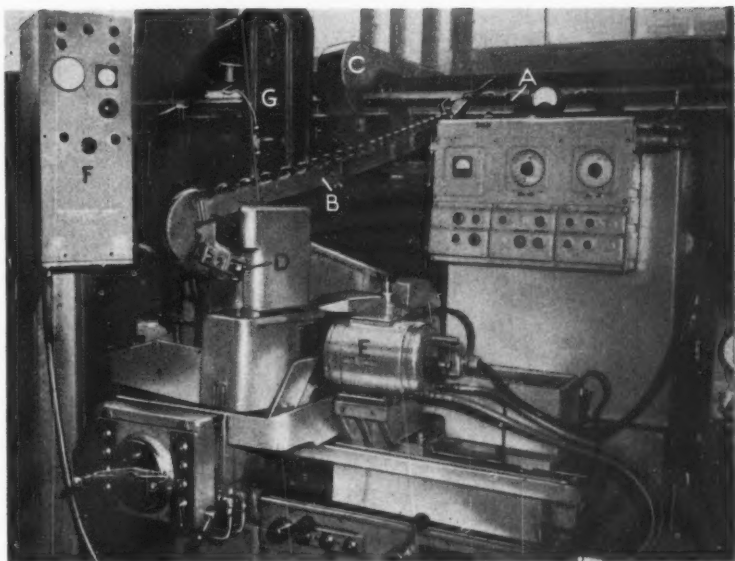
This Bench-mounted Equipment is Installed for Carrying Out Periodical Checks on Cups, for Size, Lobing, Tri-lobe Form, and Taper
